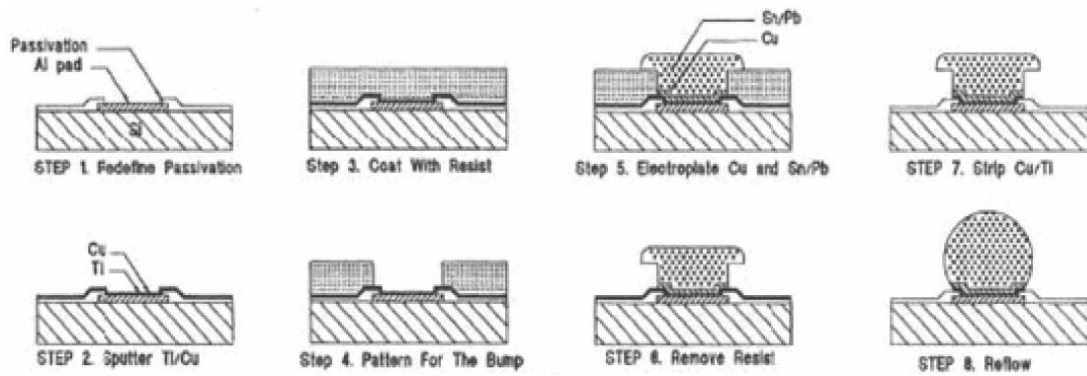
The solder bump manufacturing process by the electro plating method [17]
